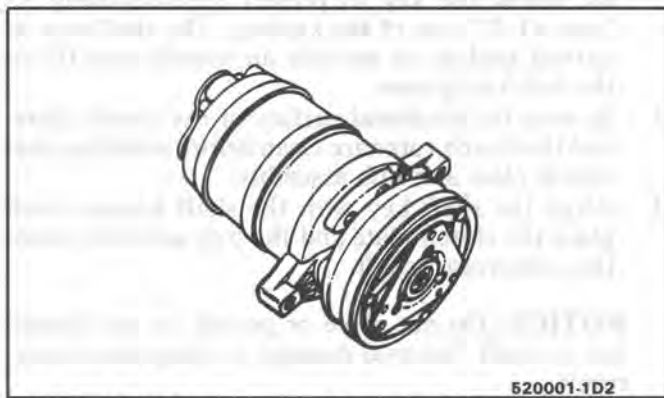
DA-6 Compressor, V-Groove Pulley & Standard Mounting
